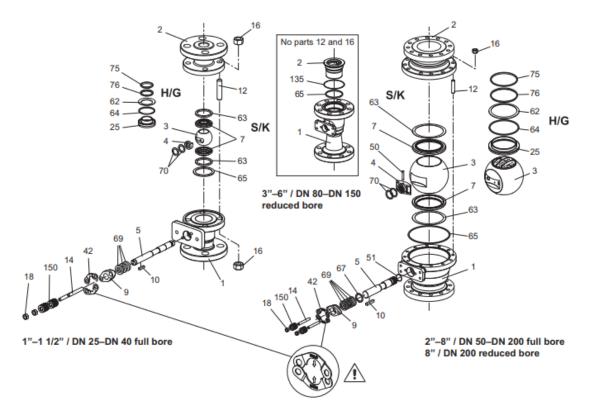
Exploded view of the ball valves parts. Part 3 - the ball and item 25 – the ball seat (Metso Flow Control Inc. 2020)
